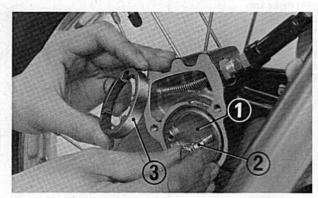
(1) Pad A (2) 6 mm bolt (3) Thrust plate guide
